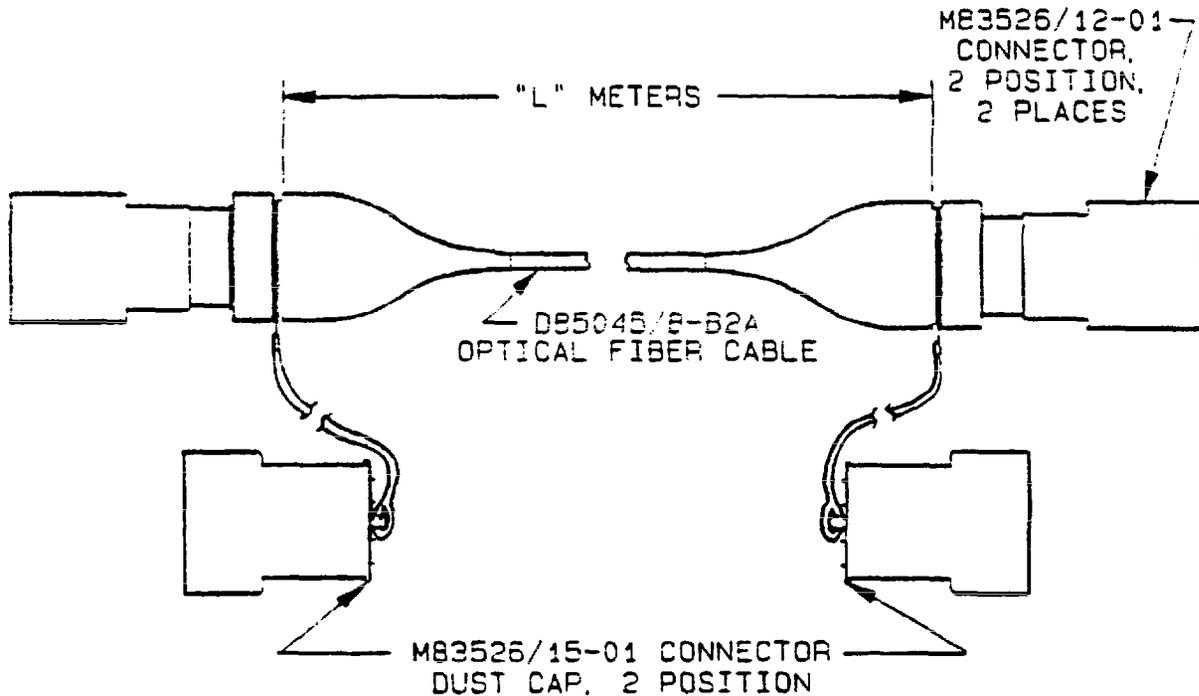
Outline drawing, cable assembly (hermaphroditic) fiber optic.
